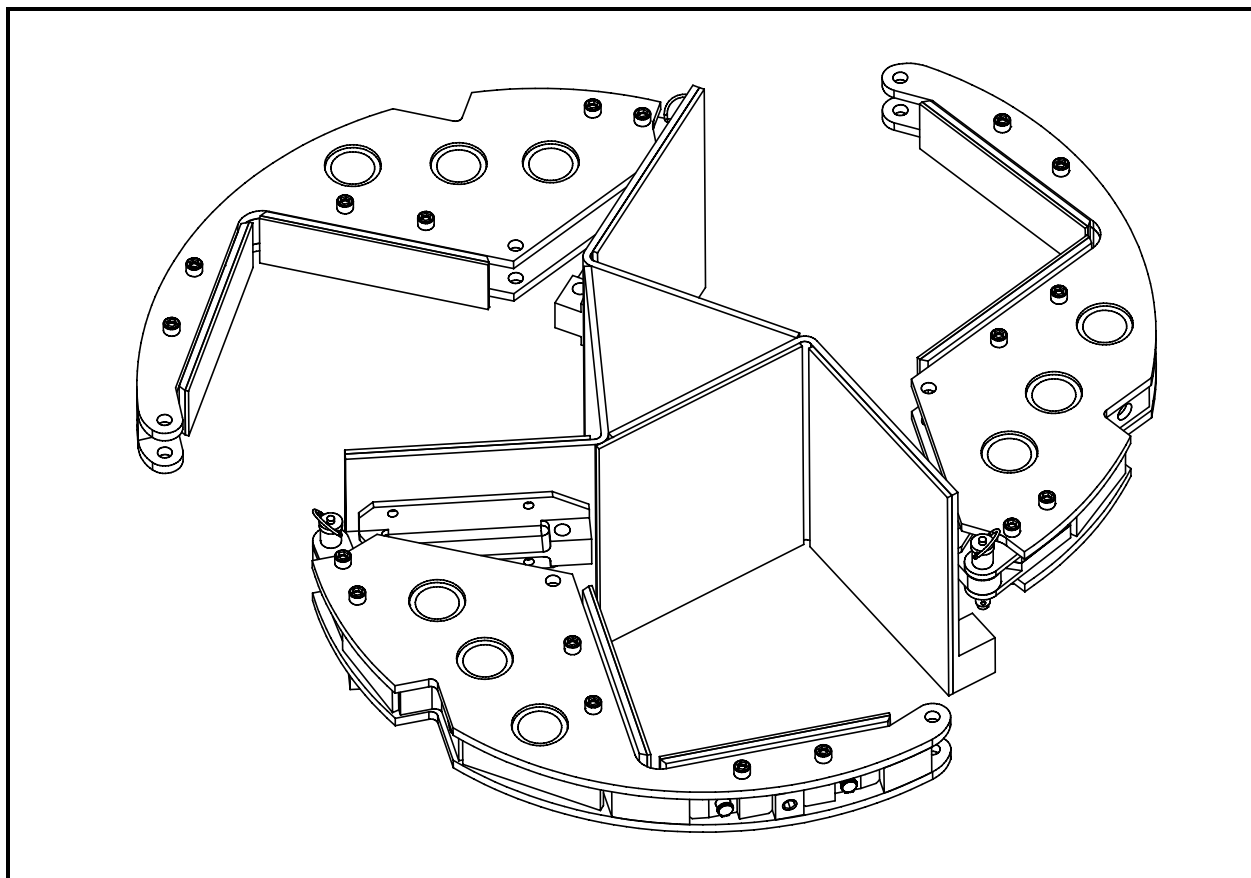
Strongback Sectional View (Clamp Arms Shown Partially Open, FCSs Removed)
